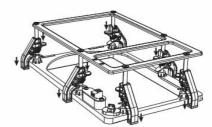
Adjusting the Mounting Clamps from the Stowed Position
